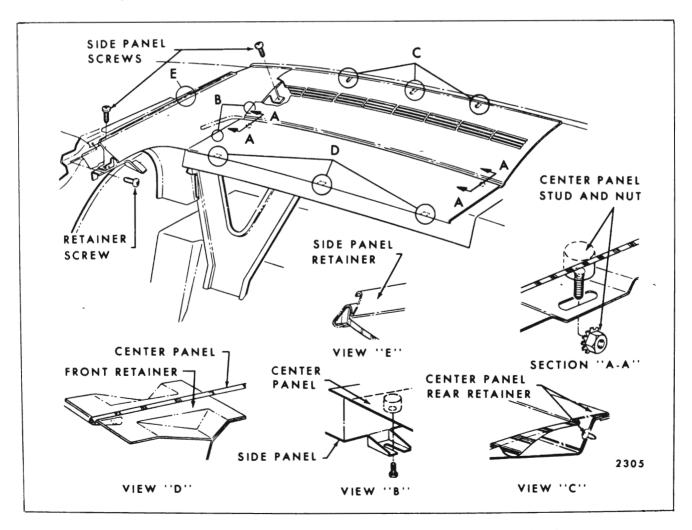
Typical "E" Style Compartment Shelf Trim (Buick "E" Body Shown)
